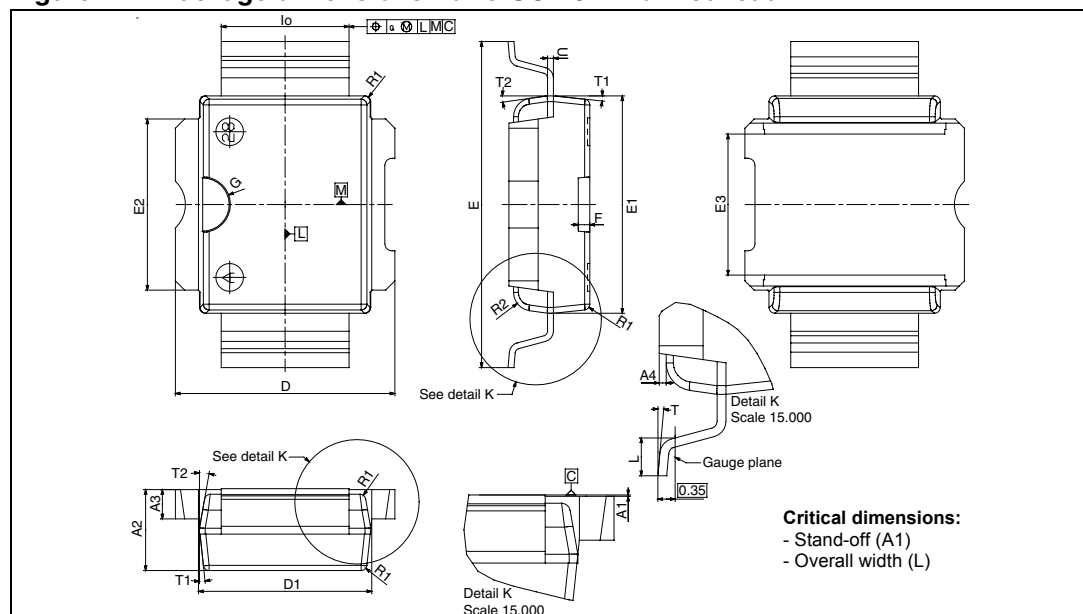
Package dimensions PowerSO-10RF formed lead
